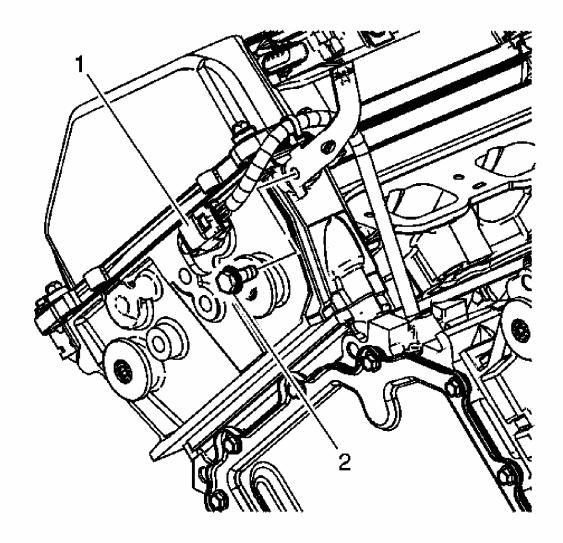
Identifying Crankshaft Position Sensor & Wiring Harness Courtesy of GENERAL MOTORS CORP.
